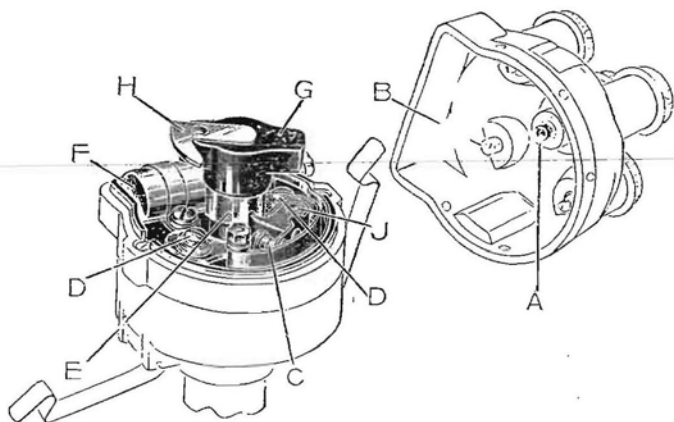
DISTRIBUTOR AND CONTACT BREAKER TYPE DK4A.
